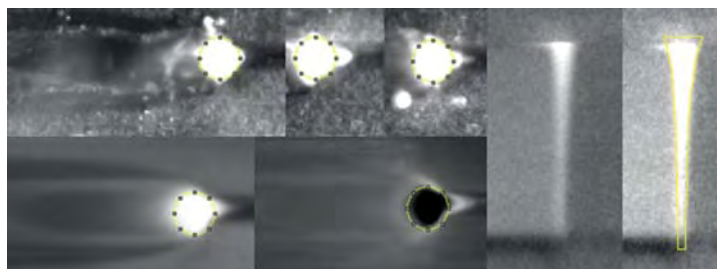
Keyhole welding process visualised with a high-speed camera: X-ray images during welding
